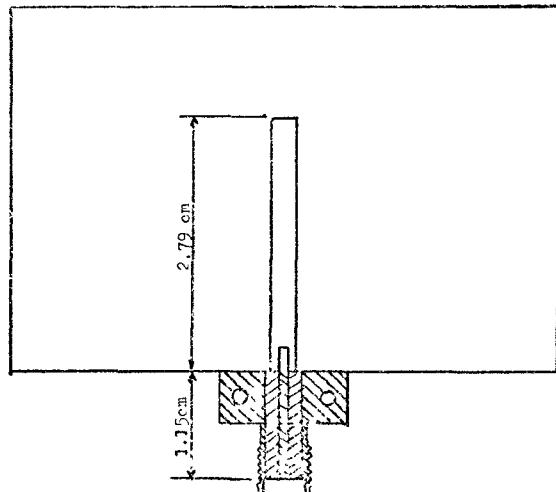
Cross section of the SMA launcher and stripline assembly.
